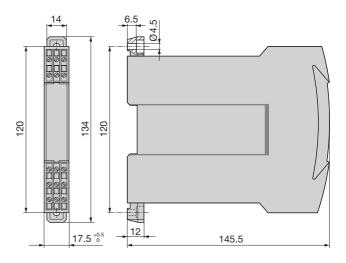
SINEAX TI 807-1.... (housing \$17) screw hole mounting brackets pulled out.
